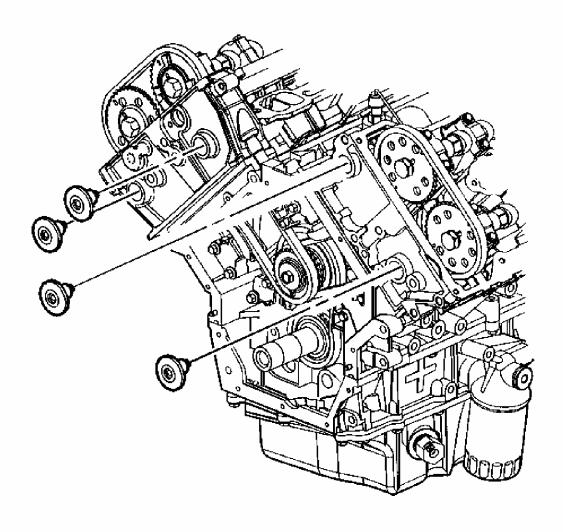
Identifying Cylinder Head Core Hole Plugs Courtesy of GENERAL MOTORS CORP.
